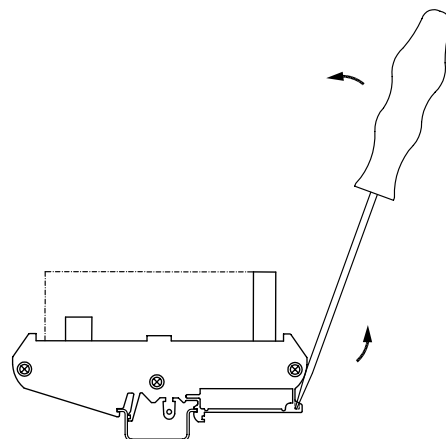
Installations instructions Termination Boards TB-XXX-..., Step 3
